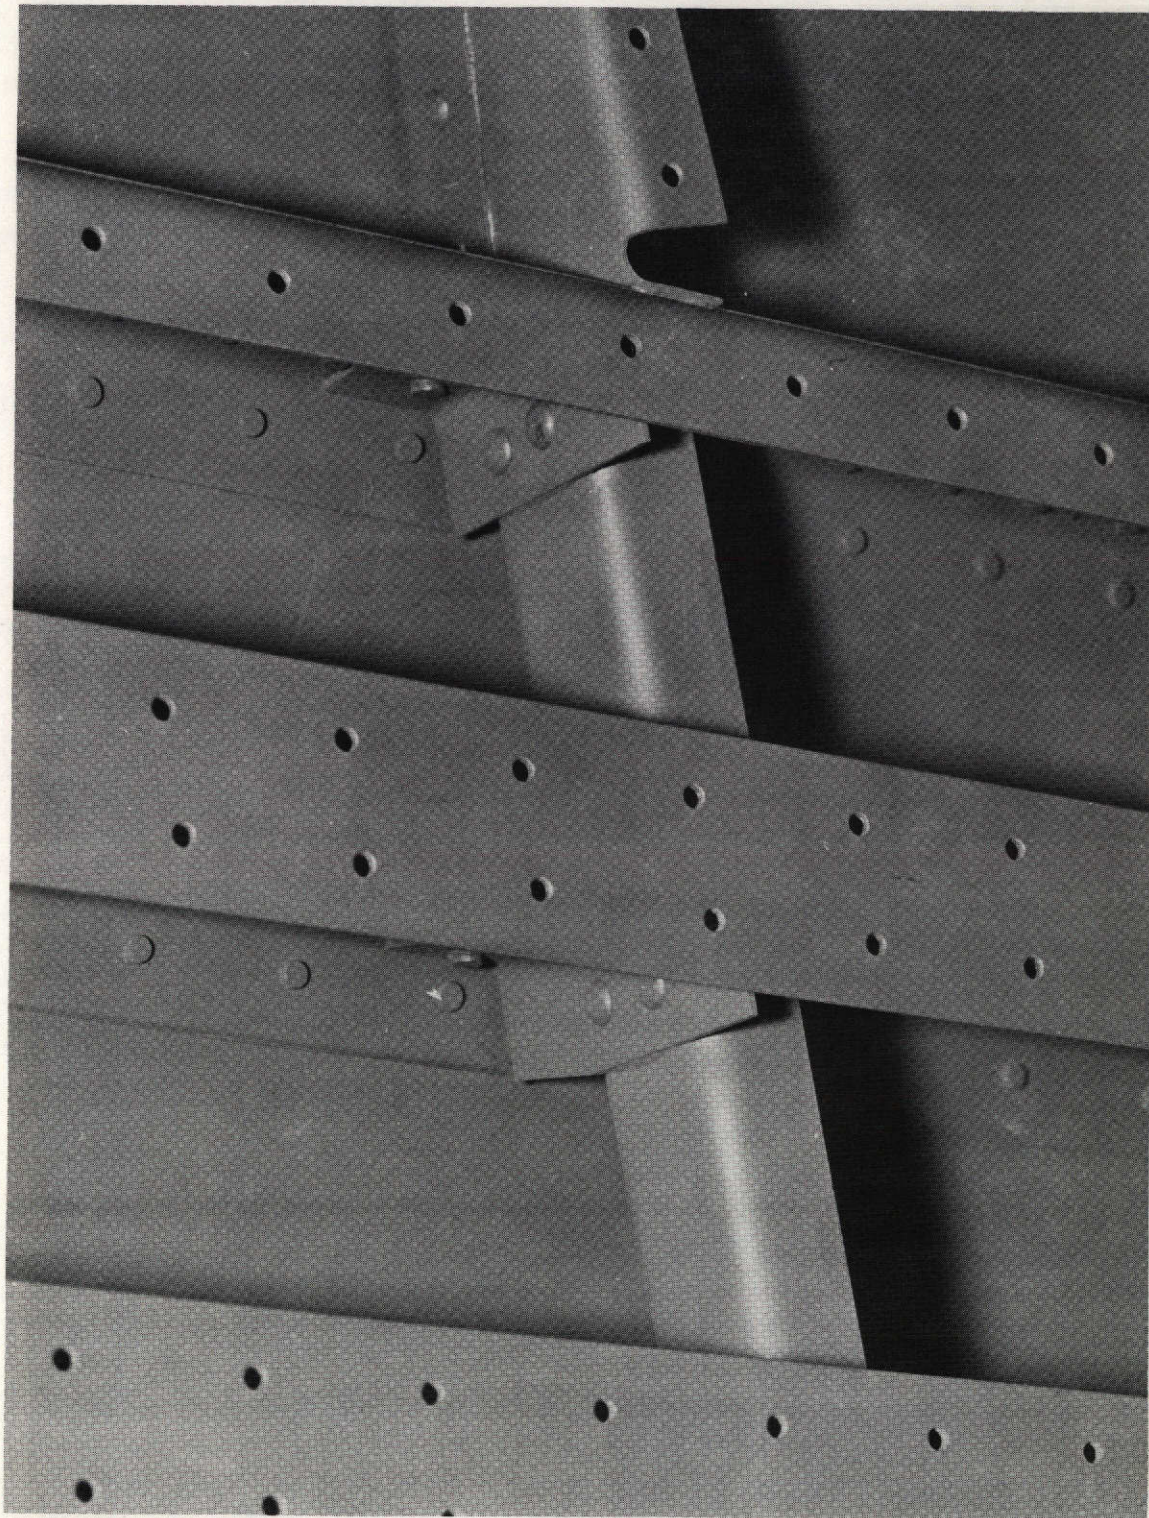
TYPICAL INSPAR RIB ARRANGEMENT
